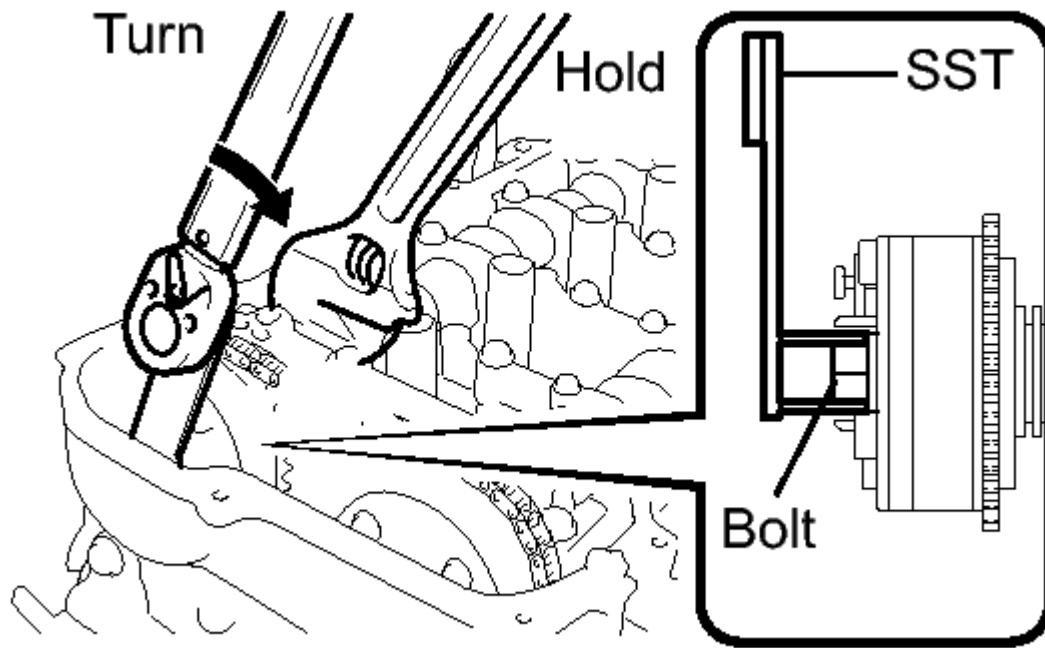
Holding Hexagonal Portion Of No. 2 Camshaft
